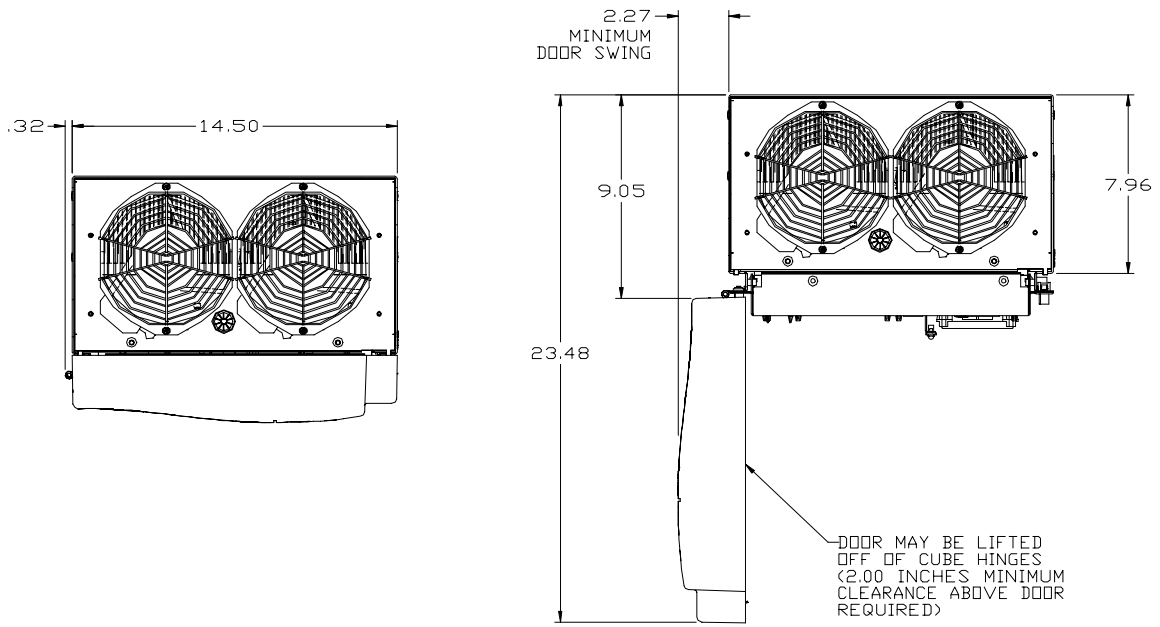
1 – A-cube Dimensions and Mounting Holes
